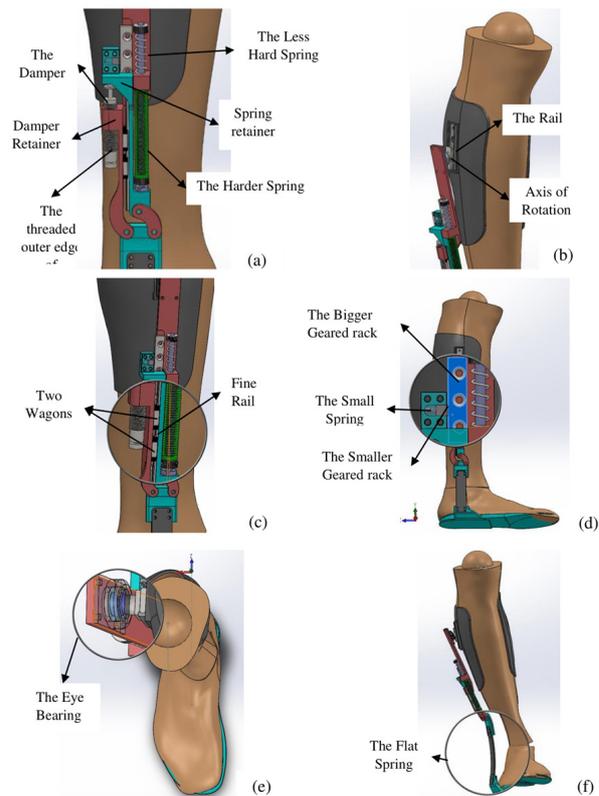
a) Spring-damper mechanism, b) the rail for accommodation, c) the retainers, d) the fine rail and wagons, e) the rattler mechanism, f) the flat spring
